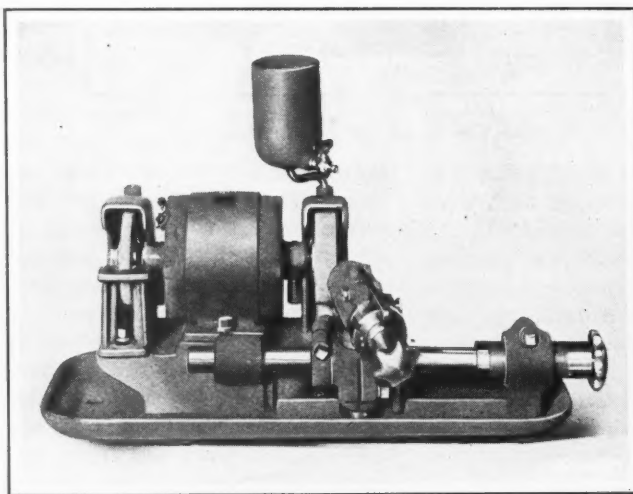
Reed-Prentice Grinder for Small Drills, Milling Cutters, and Engraver's Tools
